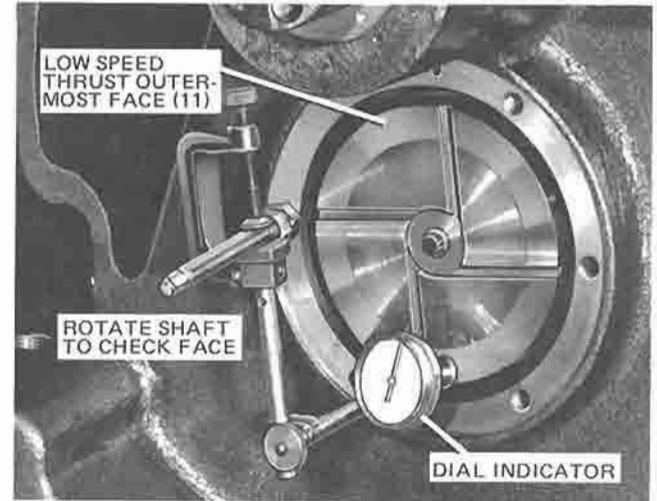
CHECKING THE FORWARD LOW SPEED THRUST COLLAR FACE FOR RUN-OUT
